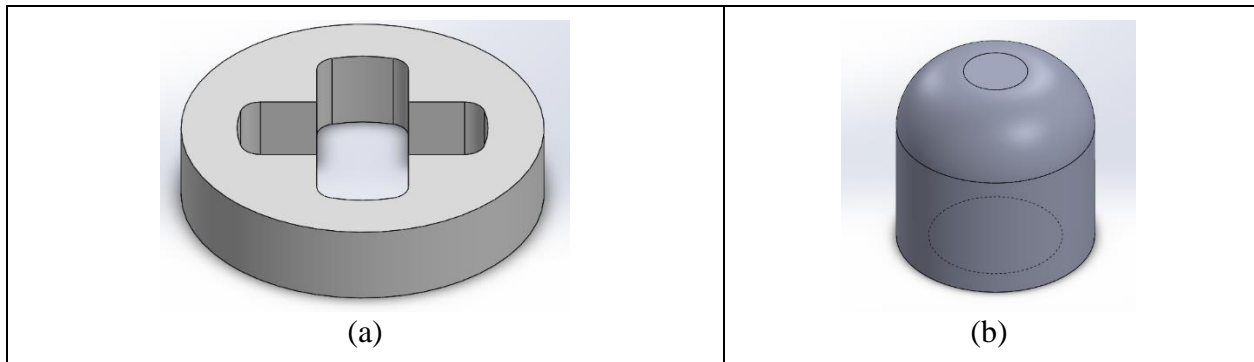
(a) Sample sabot: 0.25" tall, 1.25" outer diameter (b) Screw cap: 0.375" height and diameter.
